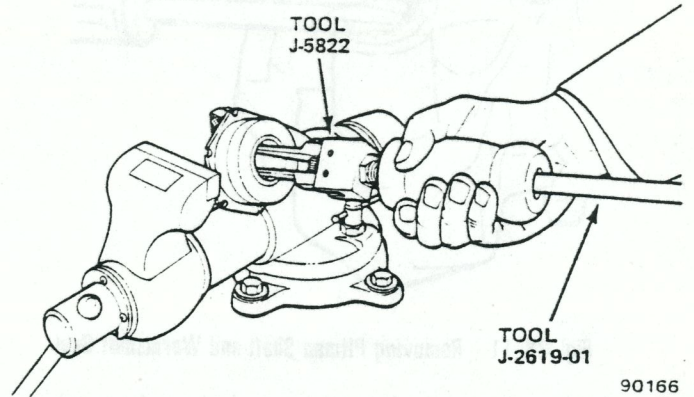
K-9 Removing Wormshaft Lower Bearing Cup
